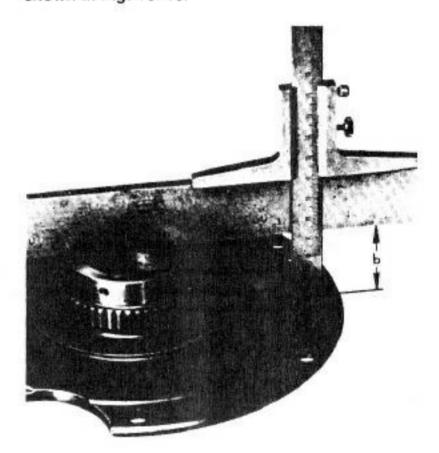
Dimension b on the transmission bearing flange. Note that the measurement is taken from the mating surface near the rim of the flange.
